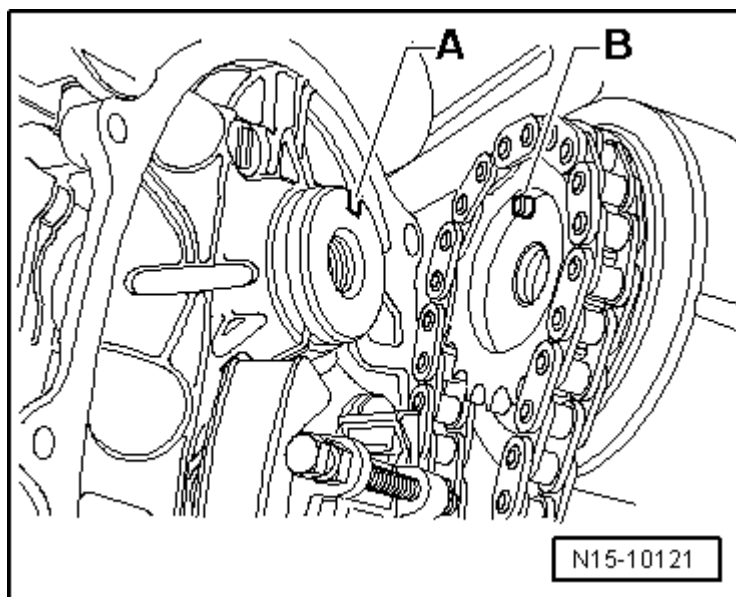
Identifying Camshaft Adjuster & Exhaust Camshaft Notch And Pin
